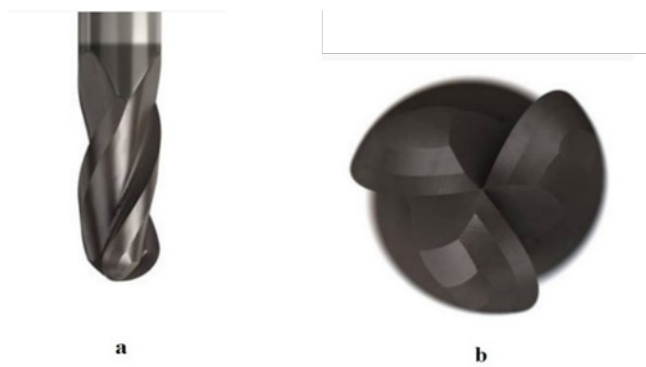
Cutting tool (a) tip of the cutting tool (b) flutes of the cutting tool
